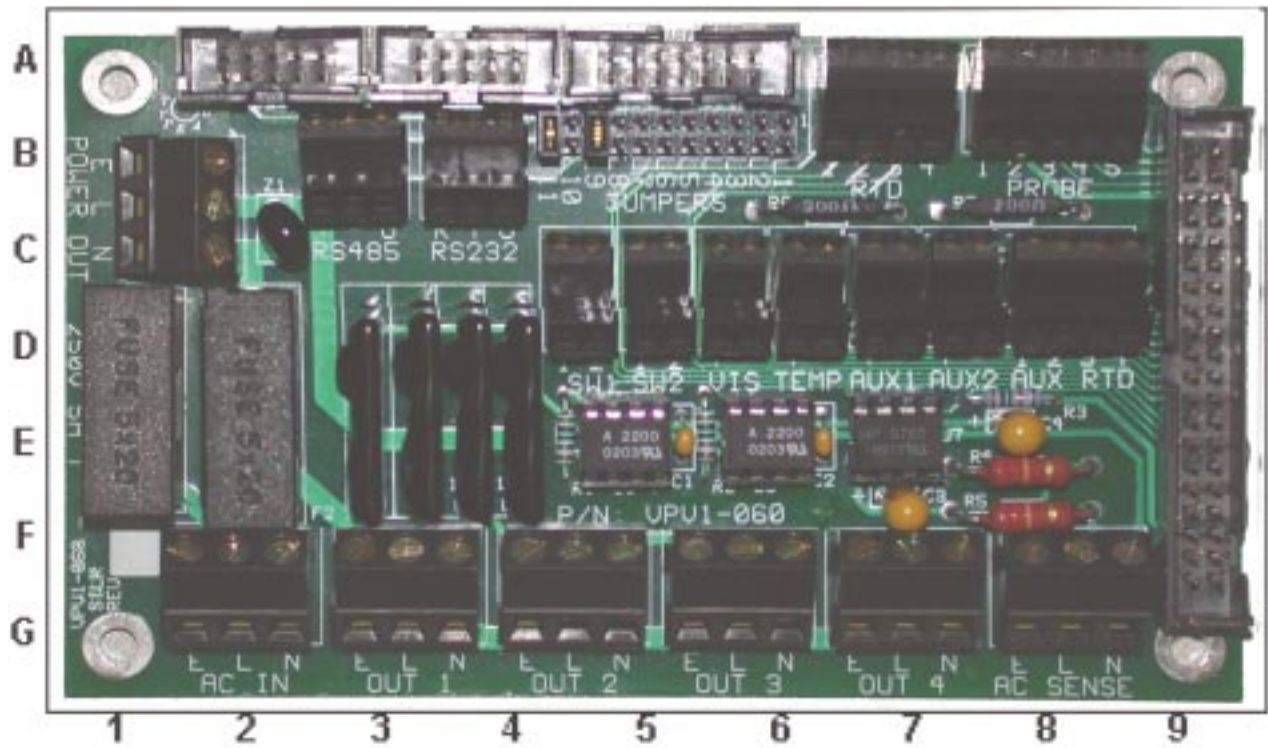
Terminal Connector Board Located Inside of the Controller
